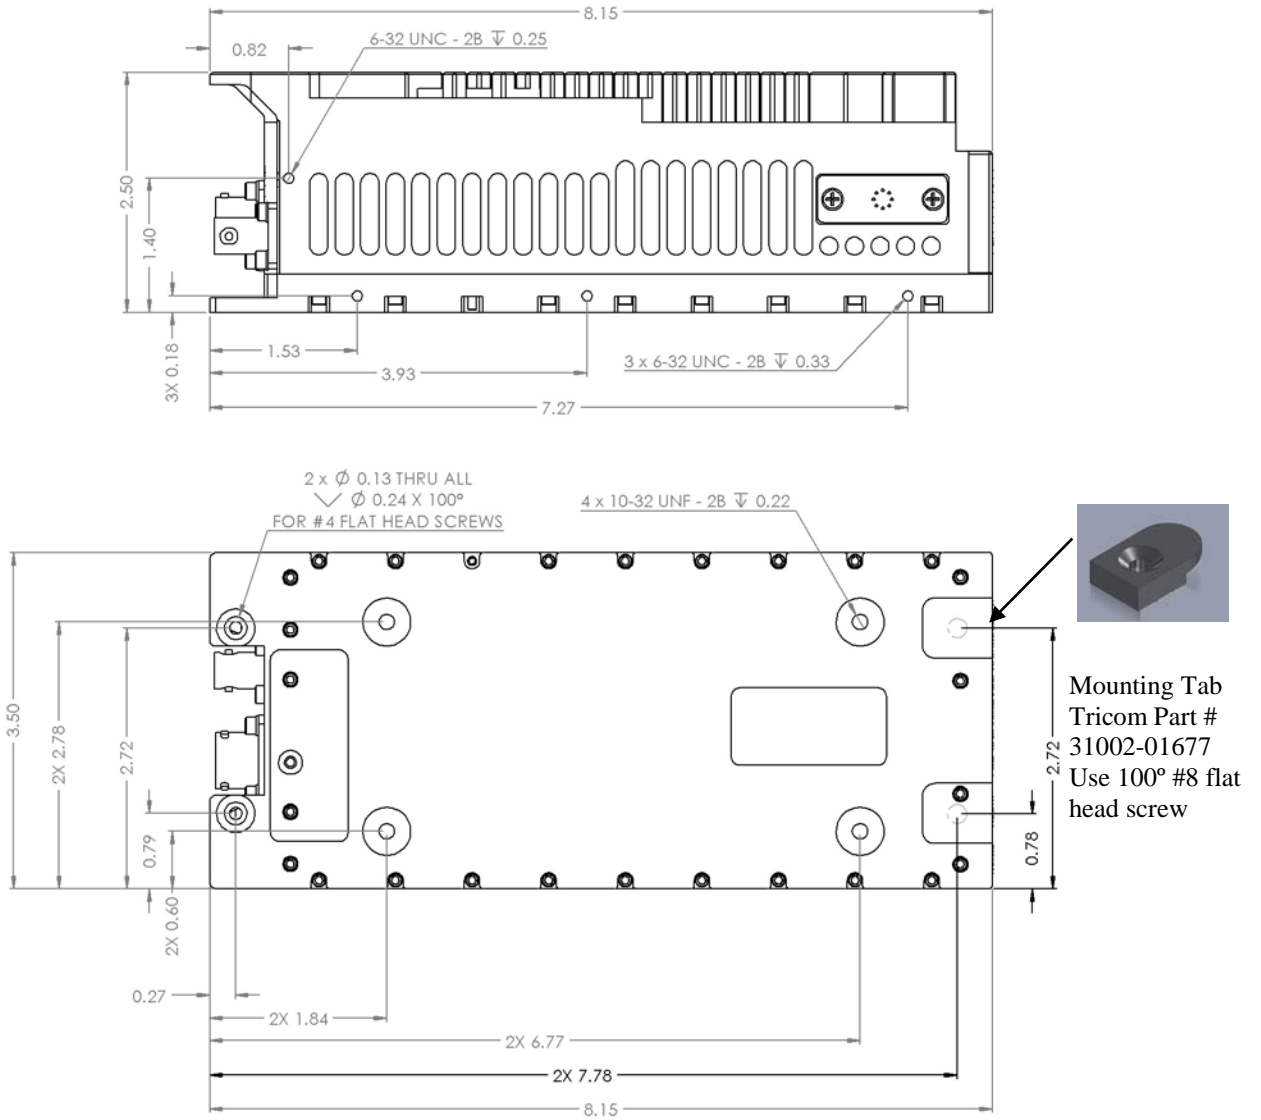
TCR-U/L-25 Outline Drawing (1 of 2)
